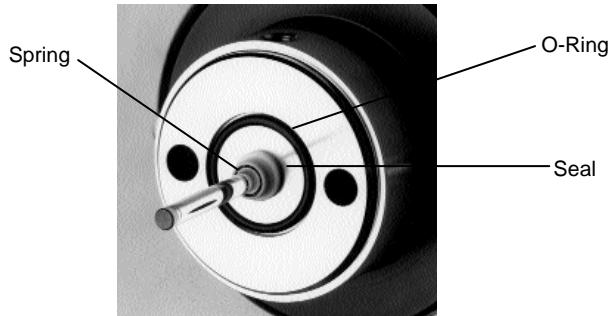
O-ring and High Pressure Seal (50 mL/min head shown)
